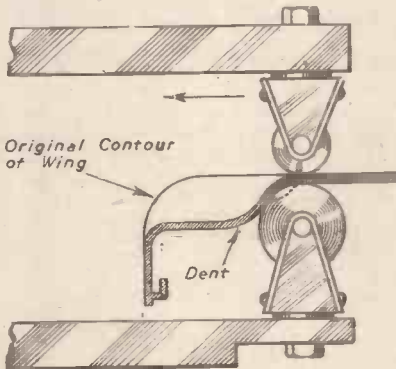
Using a special tool to roll out a dent near the edge of the mudguard.
